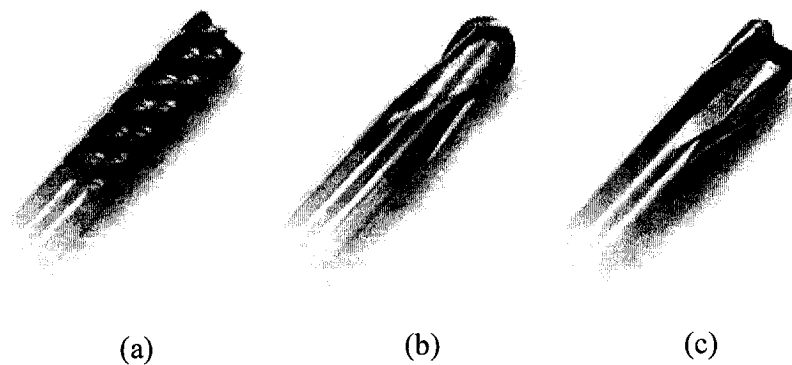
(a) Flat end-mill, (b) ball end-mill, and (c) bull end-mill
